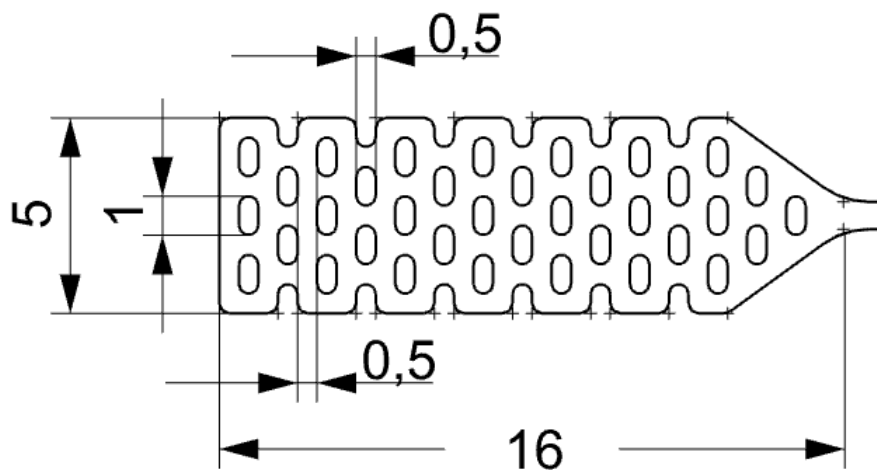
Close-up of the plasma extraction structure. Dimensions in millimetres.
